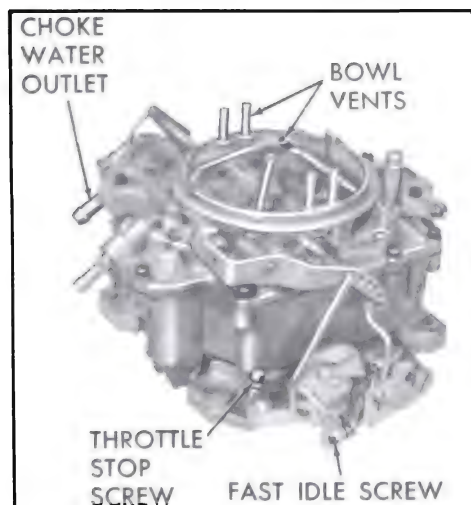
Rochester 4-Barrel Carburetor-300 Engine
